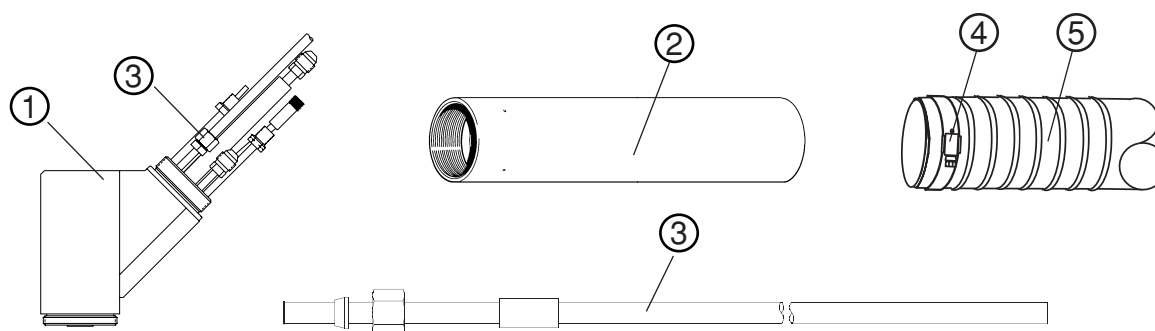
45° Torch Quick Disconnect Assembly, Mounting Sleeve and Torch Vent Hose
